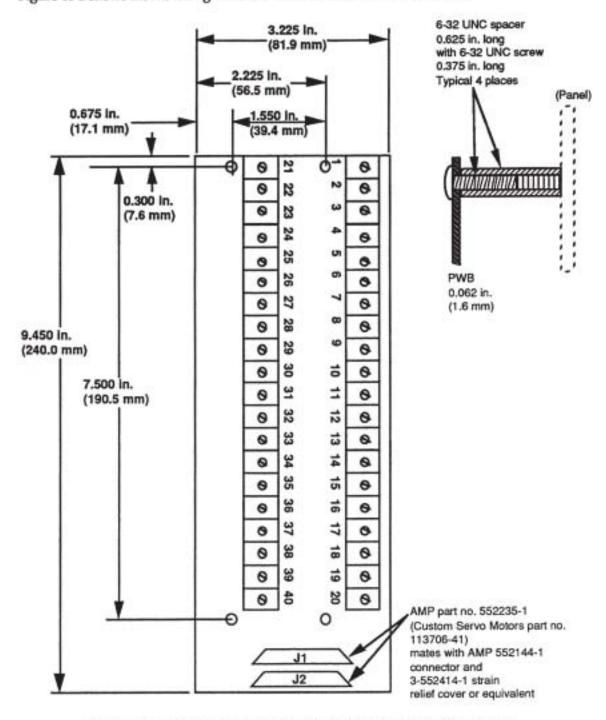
473.38c-02A Remote Terminal Board Mounting Dimensions
